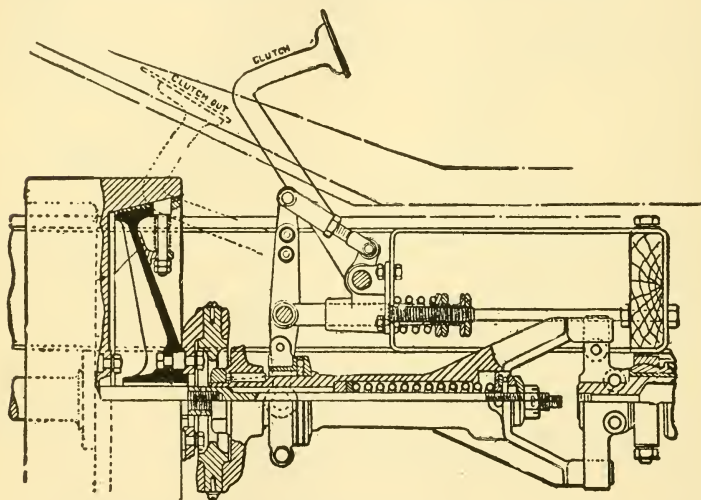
Showing method of mounting a cone clutch. The dotted outline of clutch pedal shows position for releasing the clutch.
